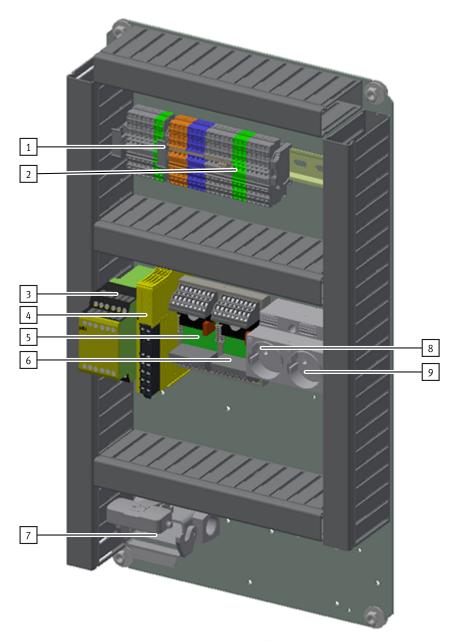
Electric board, back, robot assembly cell / Similar to illustration
